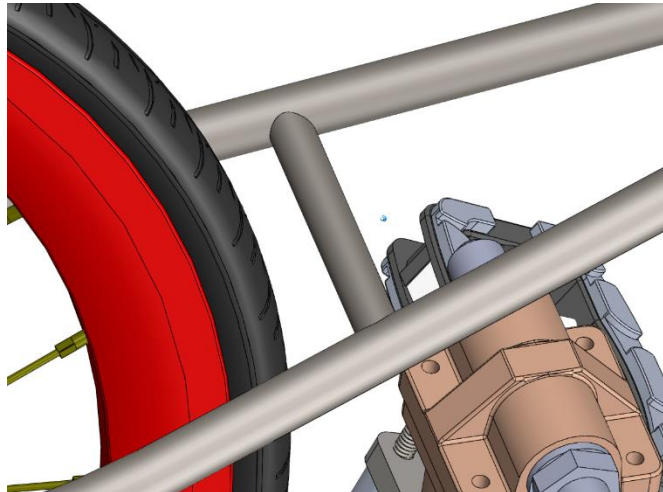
Example of chainstay bridged welded between tubes for lateral rigidity
